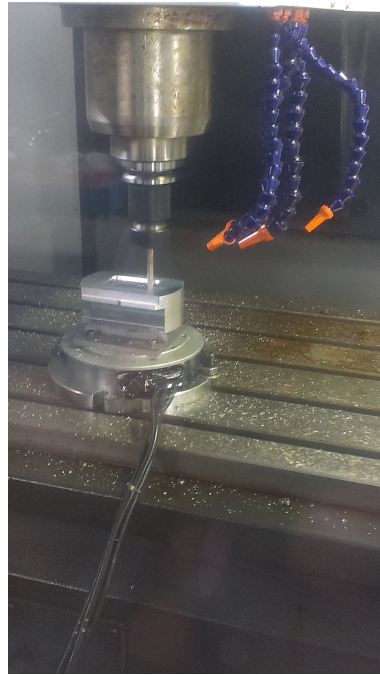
Workpiece mounted on 3-axis force dynamometer
